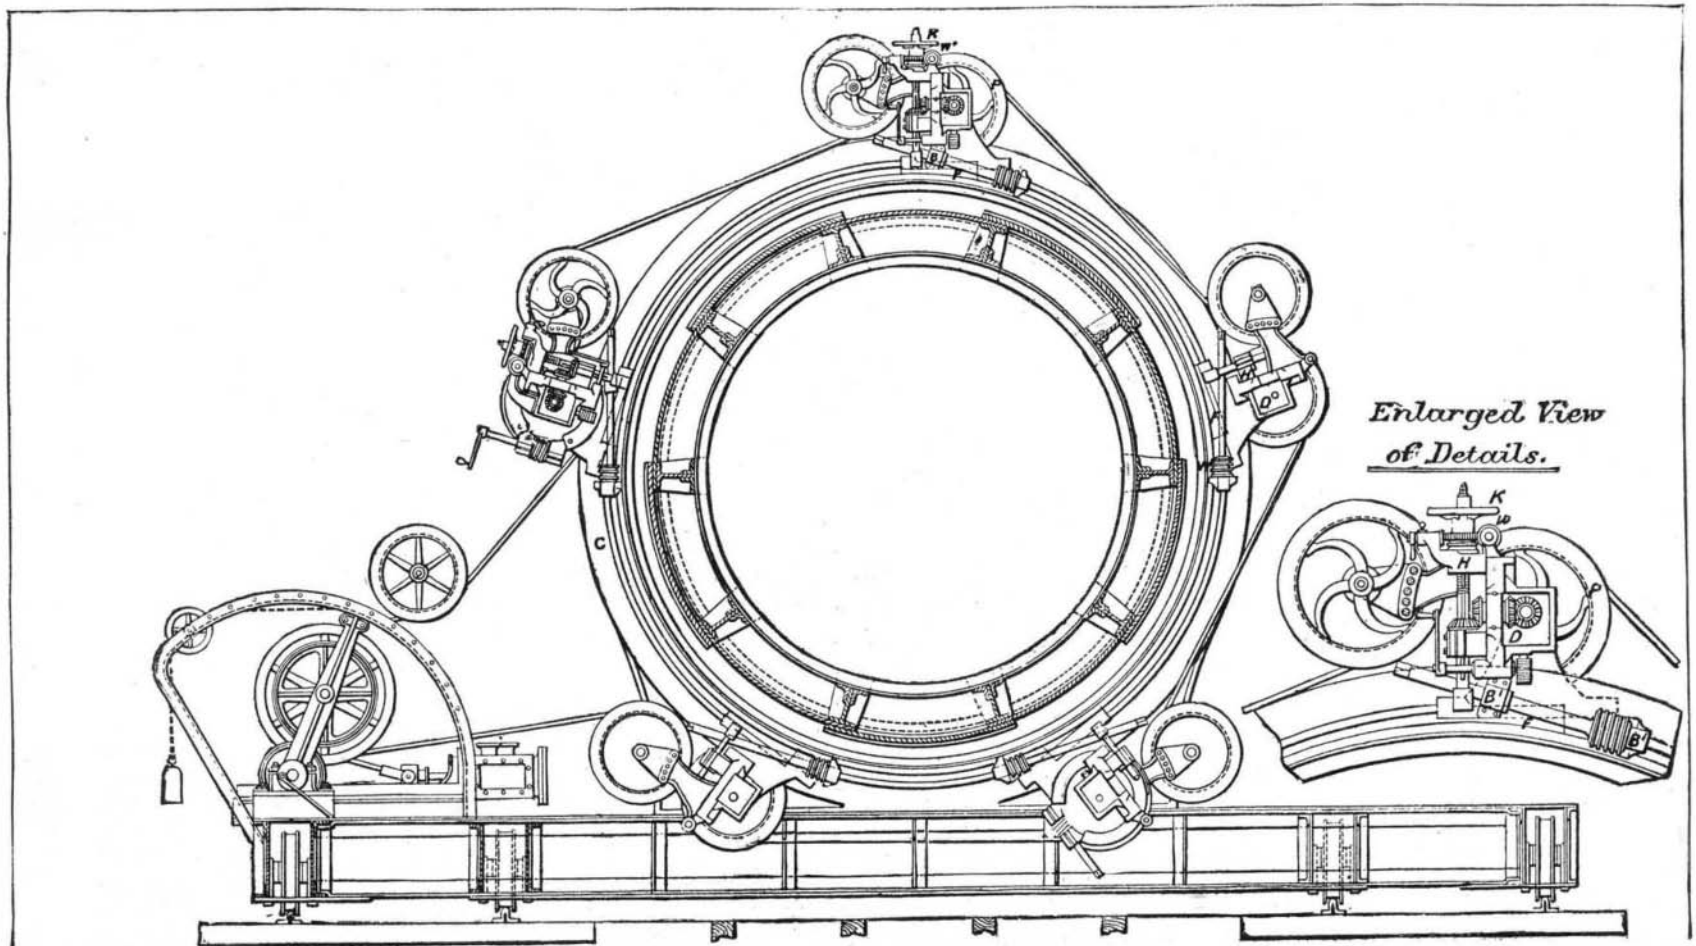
SECTION OF TUBE DRILLING MACHINE.
